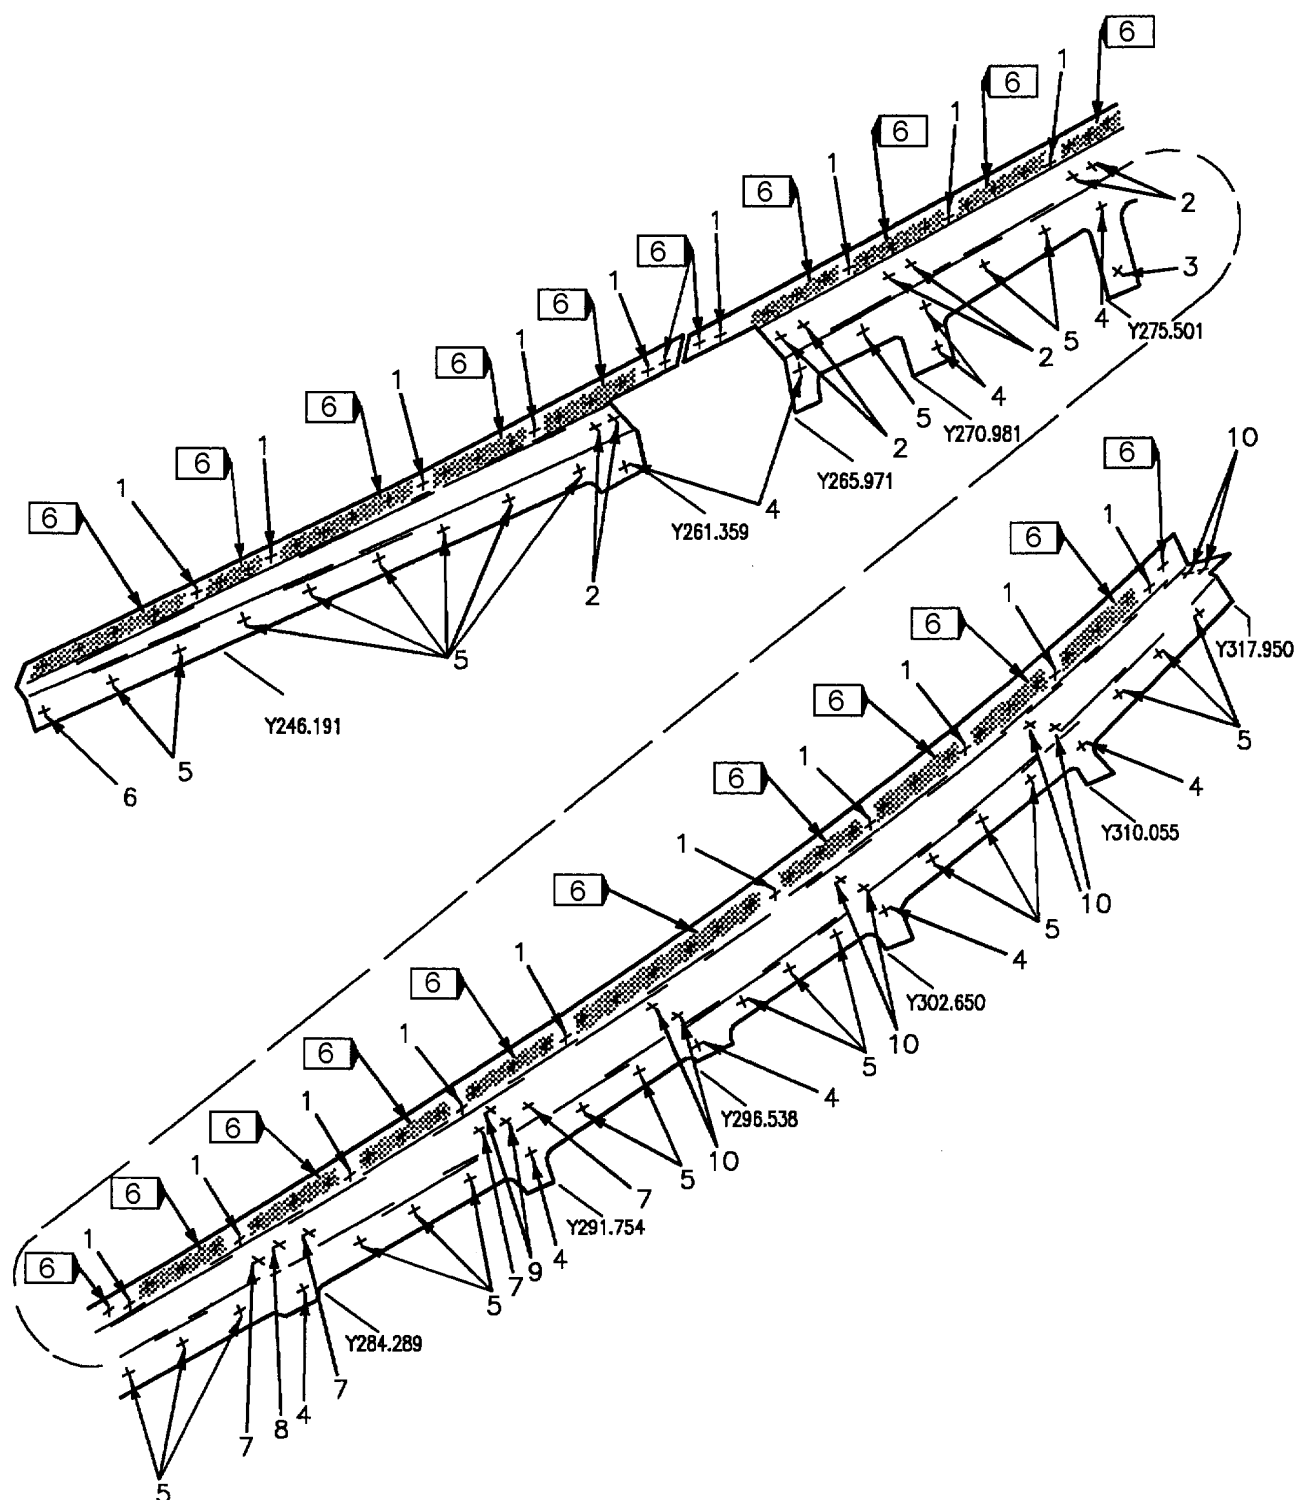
Inspection or Replacement - Upper Fairing Support (Sheet 3)
